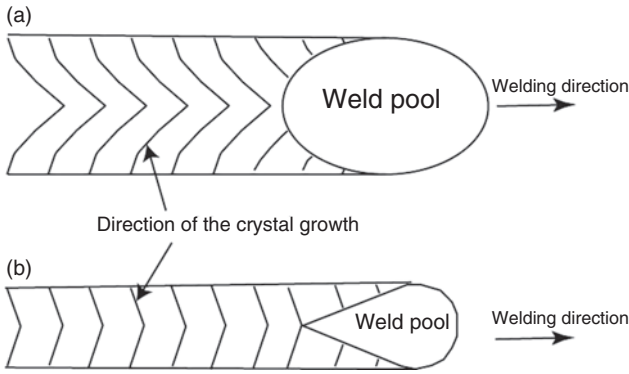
Effect of the welding speed on the solidification cracking at (a) low welding speed and (b) high welding speed.
